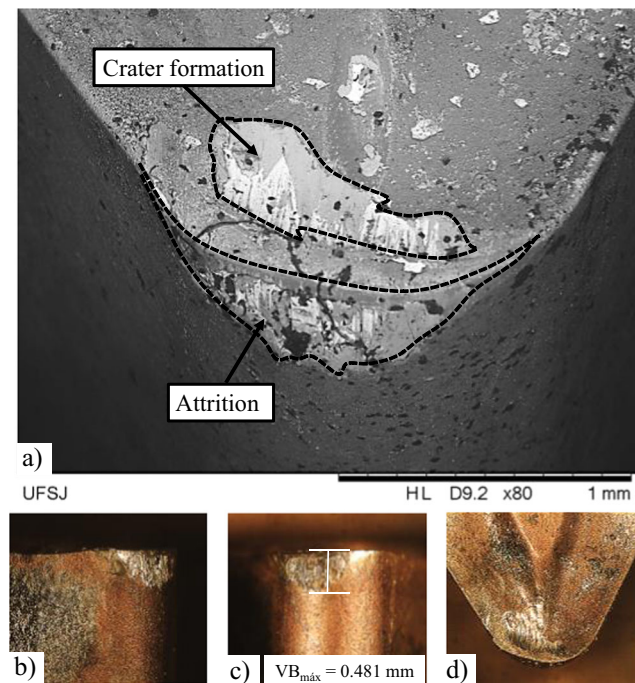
Cutting tool with $VB_{max} = 0.481$ mm used in dry turning with cutting speed of 600 m/min. a SEM. b Clearance surface. c Tip. d Rake surface
